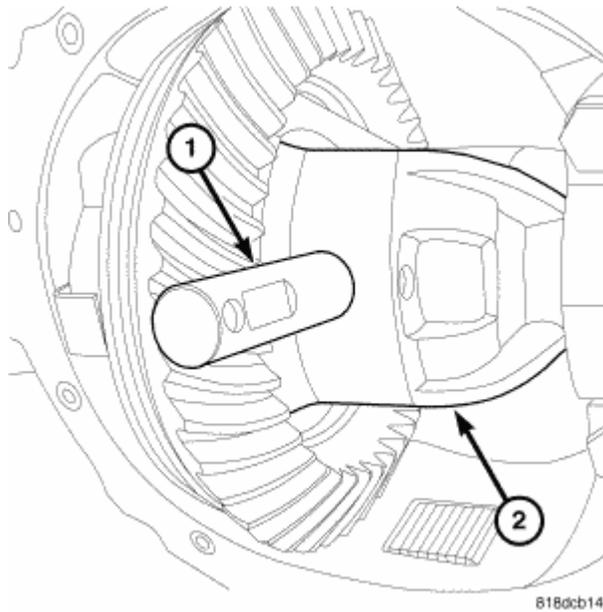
Identifying Pinion Mate Shaft & Differential Case
